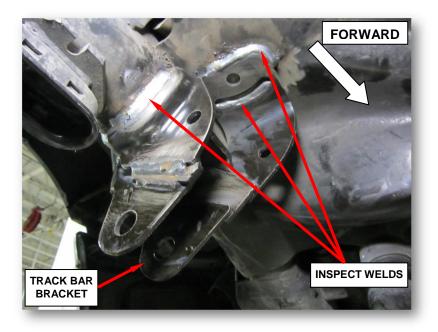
Suspect <u>ALL</u> Weld Locations on Front and Back Side of Track Bar Bracket (Track Bar Removed for Photographic Purposes Only)
